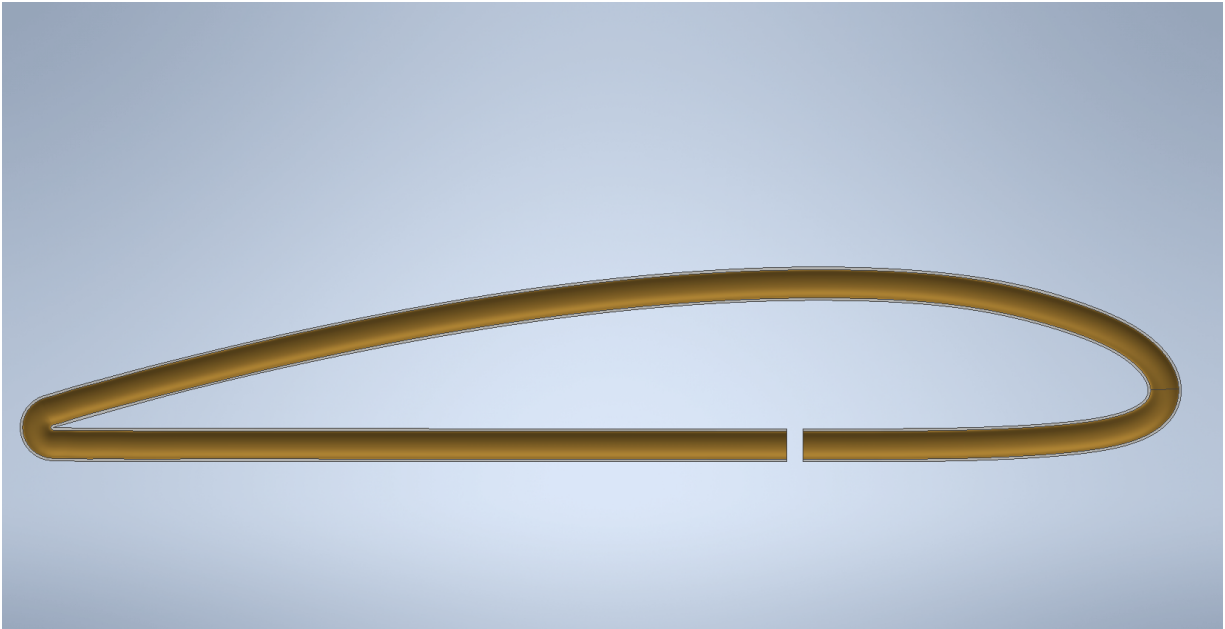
Side section view showing a hollowed out single wireframe section, highlighting potential electrical connection placement
